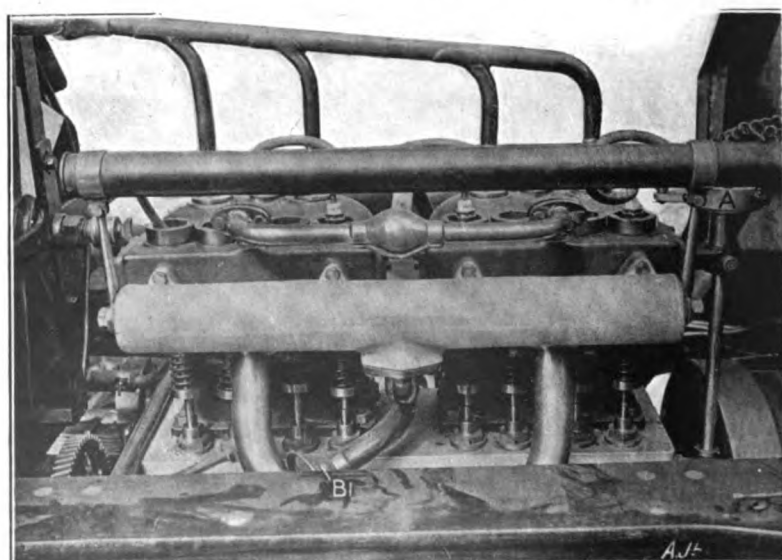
View of the 16-20-h.p. Cupelle Engine, showing the inlet and exhaust valves, and the position of the air in-take pipe, B¹, for the carburettor.
